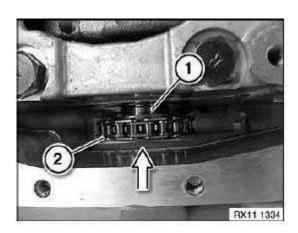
Identifying Oil Pump Sprocket Wheel And Crankshaft Courtesy of BMW OF NORTH AMERICA, INC.
